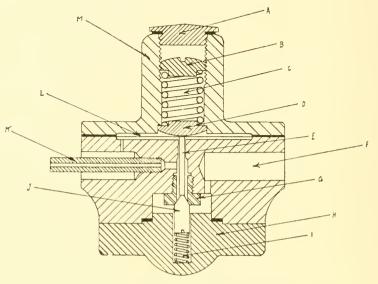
CROSS SECTION ALCO LIQUID CONTROL VALVE.
